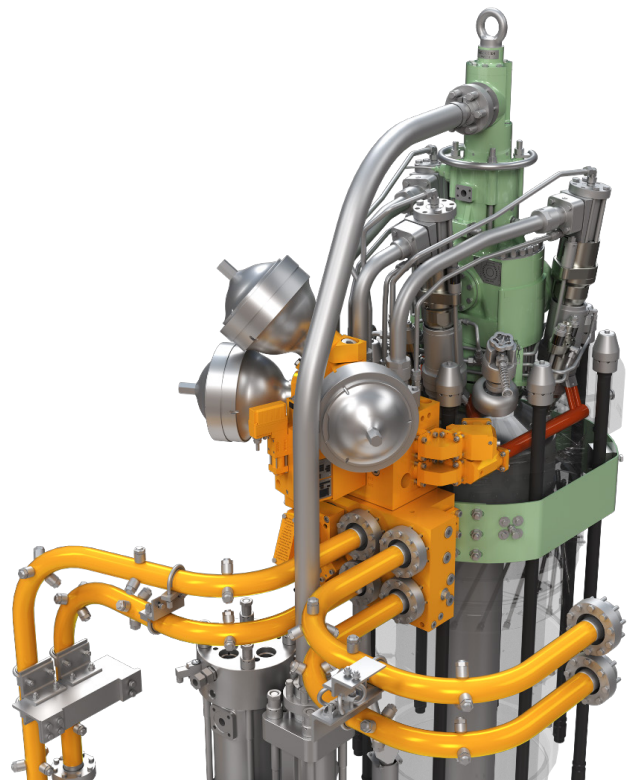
LGI concept for 60-bore engine with three fuel oil valves and three FBIVM per cylinder. For illustration purposes only.
